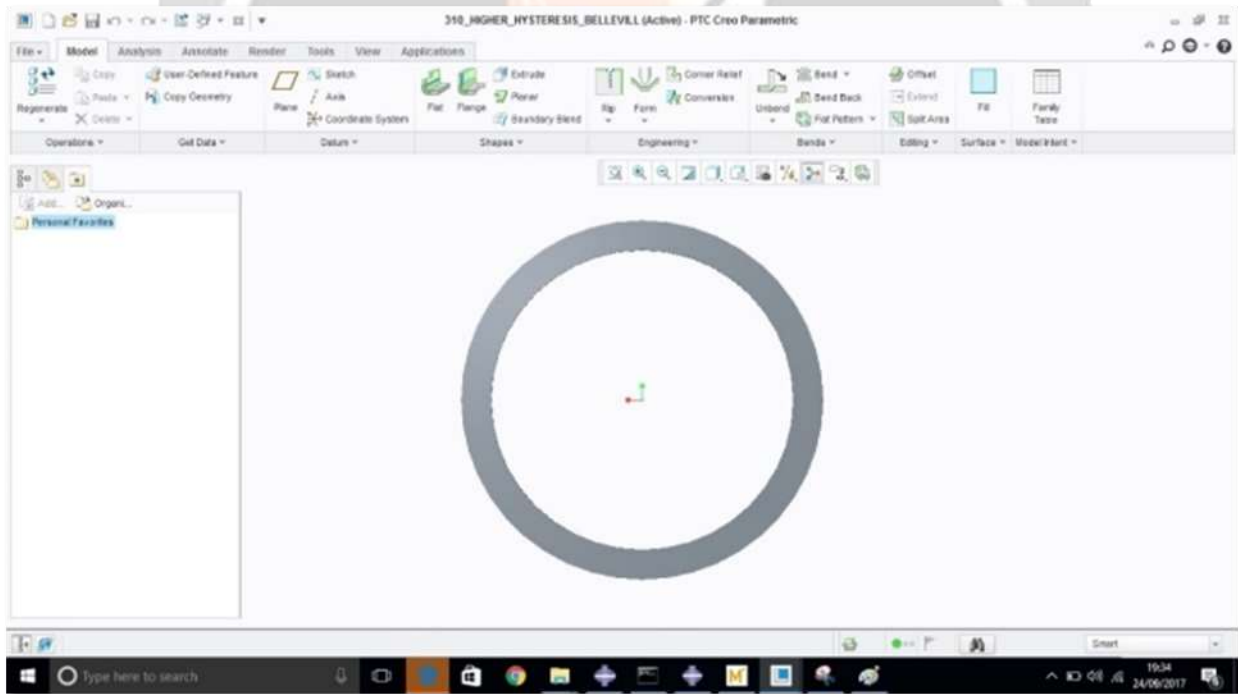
3D Model of Cupped Spring Washer (Top View)
